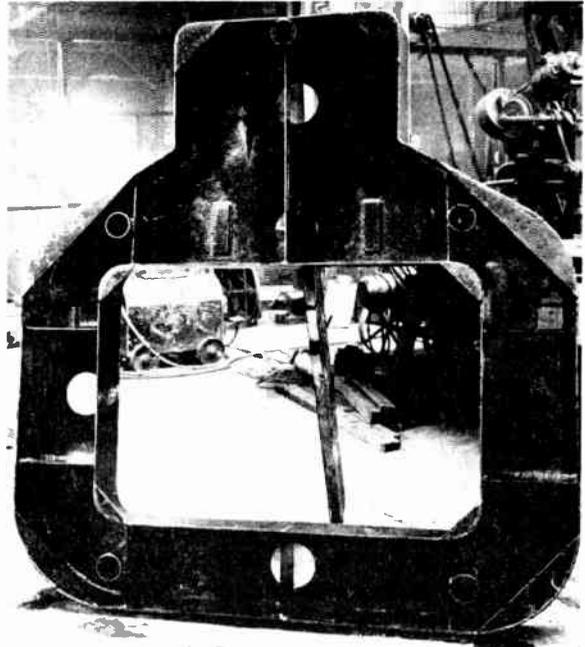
A STEEL FABRICATED FOUNDATION PLATE.
